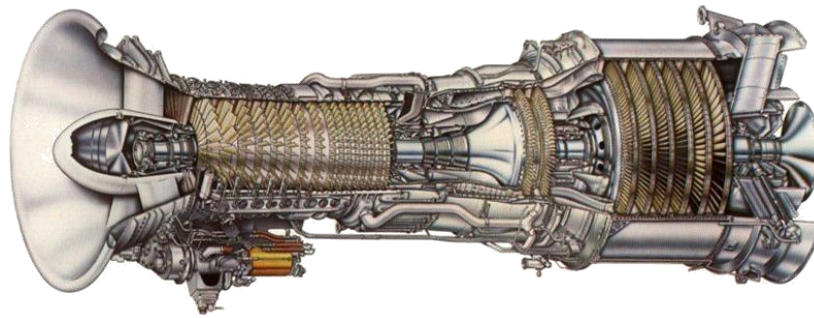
GE LM2500-30 Turboshaft Engine Cutaway [35]
